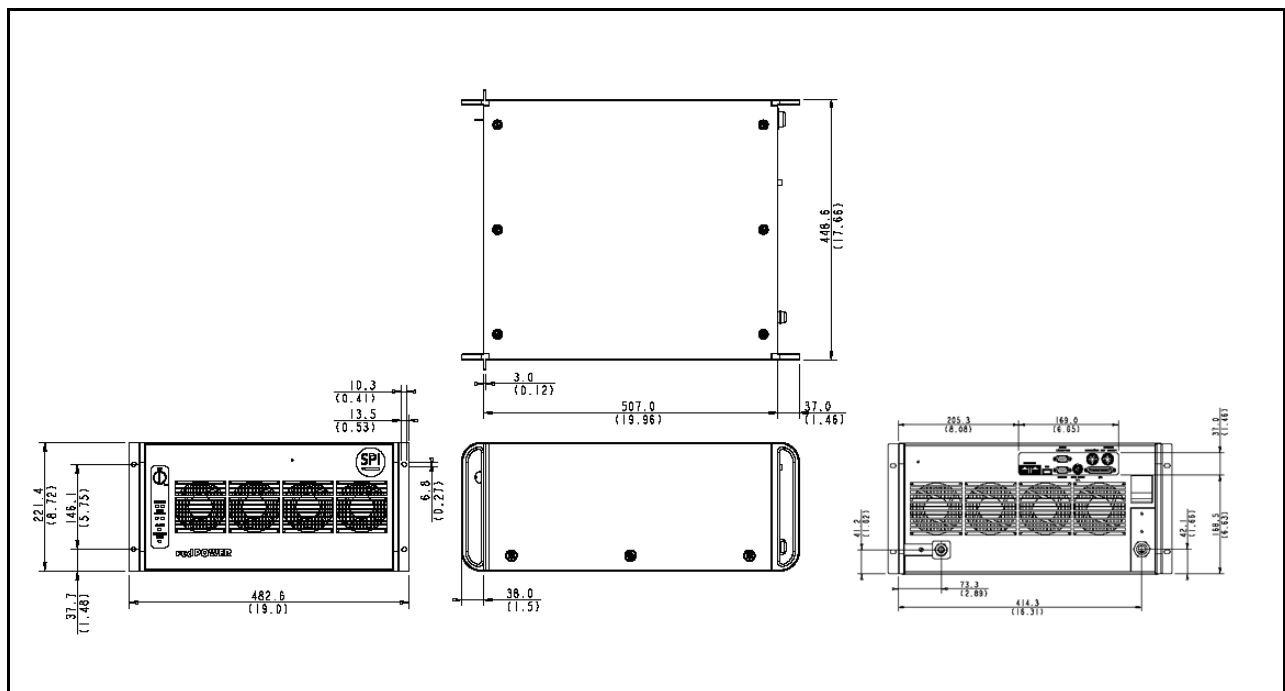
Outline Drawing – Laser System – Air Cooled Variants
